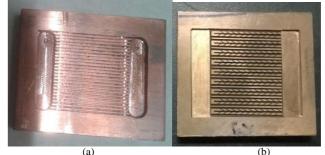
Experimental test pieces (a) conventional straight and (b) leaf pattern heat sinks
